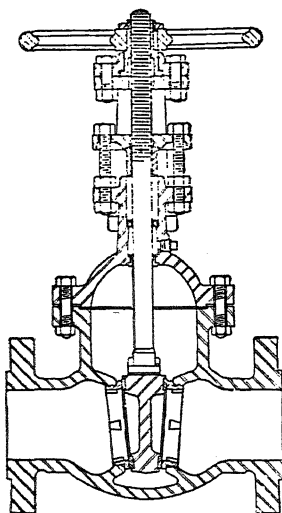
Wedge gate valve for 600 lb. working steam pressure.
